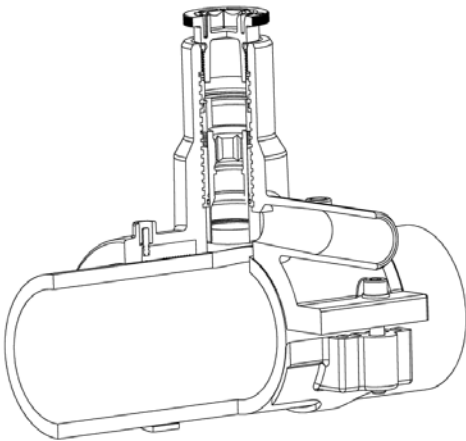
Electro-socket welding of a tapping tee (principle).
